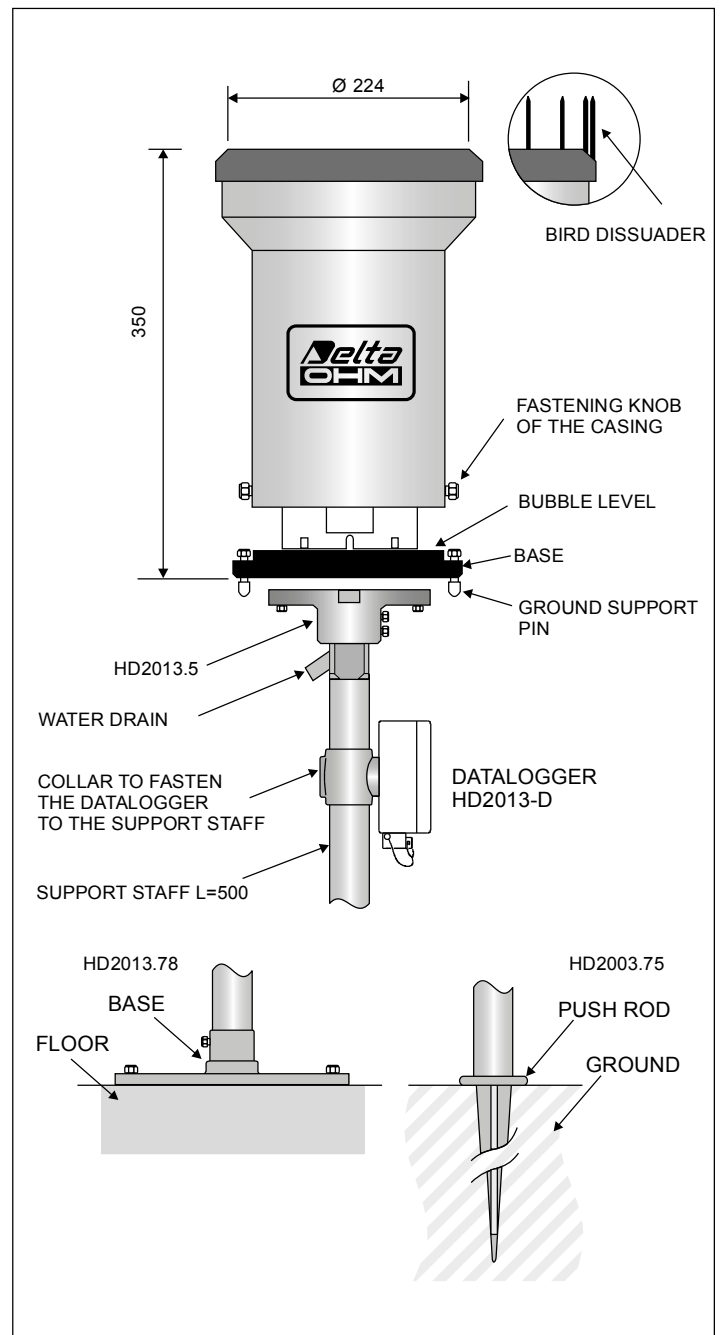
Mechanical dimensions, and floor or ground fastening system.
